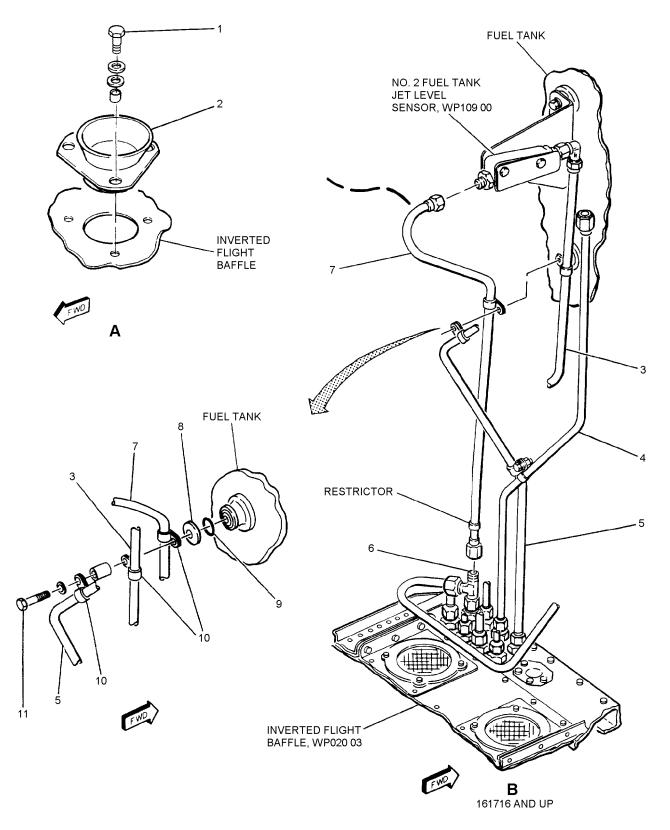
No. 2 Fuel Tank Level Sensor Tube Restrictor (5RAP667) (Sheet 2)
